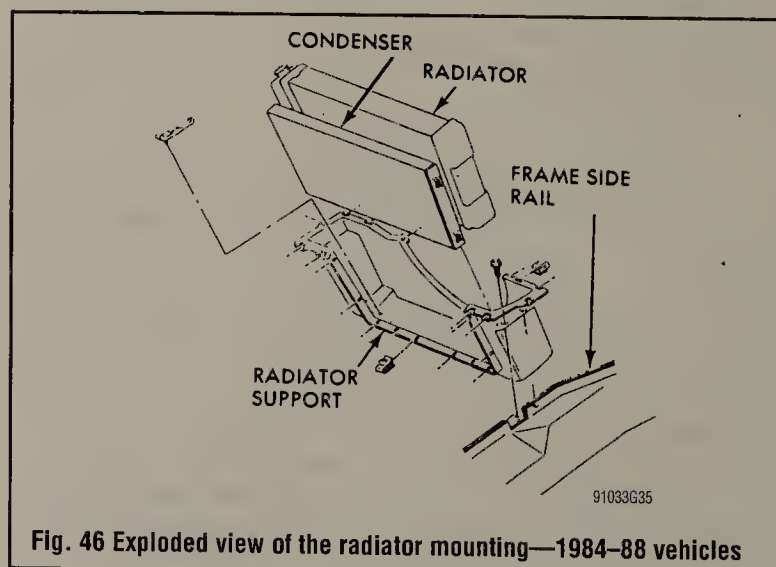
Exploded view of the radiator mounting—1984–88 vehicles
